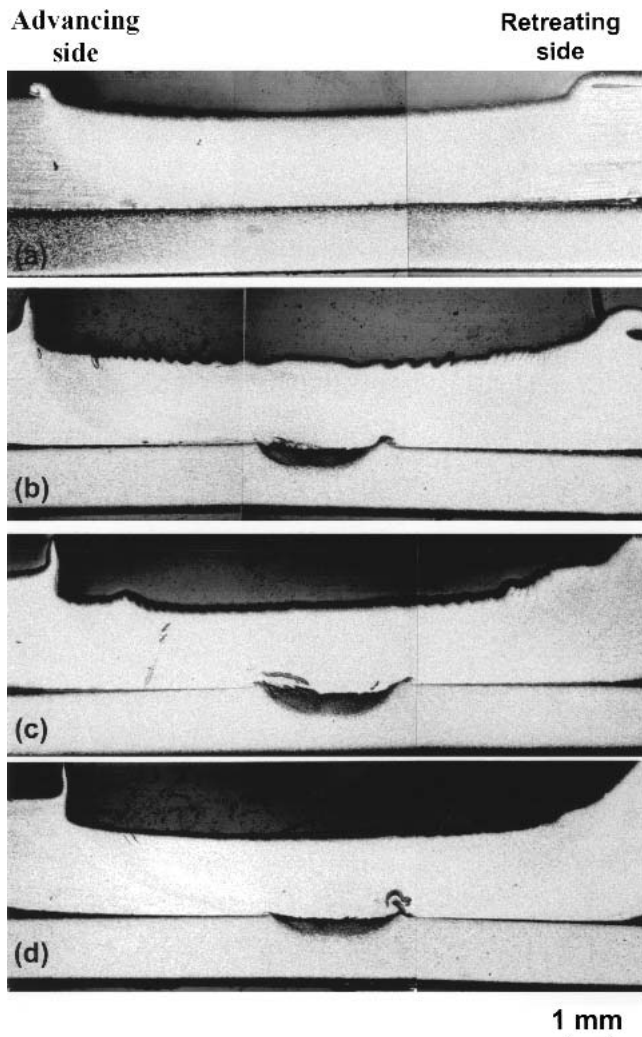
Macrostructures of the transverse sections of joints. (a) Weld No. 1. (b) Weld No. 4. (c) Weld No. 7. (d) Weld No. 10
